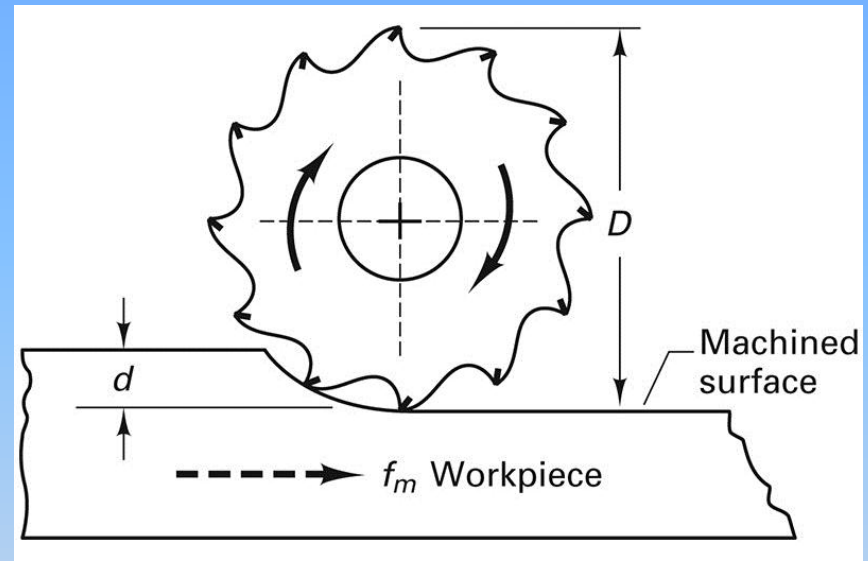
Slab or side milling being done as a down milling process with horizontal spindle-machine.
